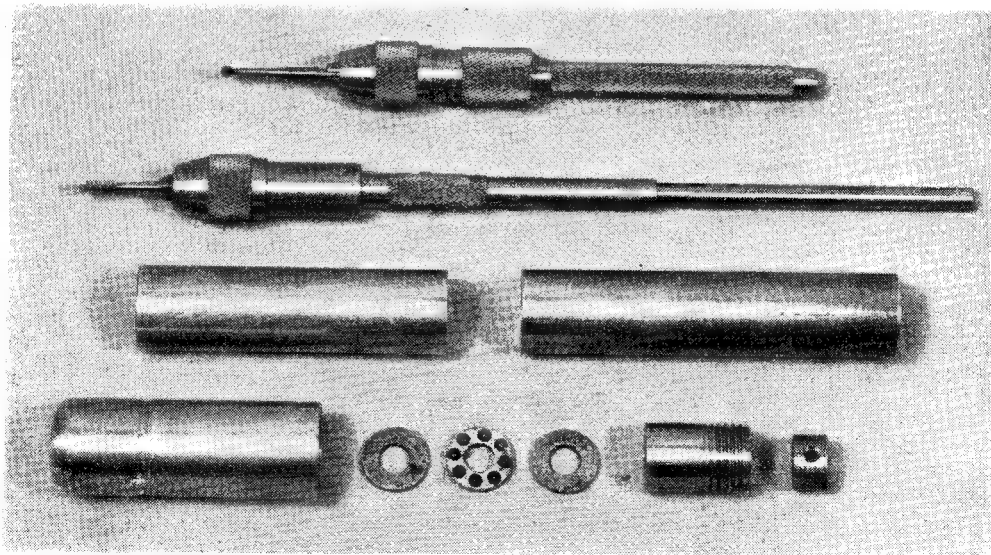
Top—Eclipse No. 3 chuck-type pin vice, gripping rose head-type dental drill. Centre—Spindle fully machined with extension driving spigot pinned in position. Lower centre—Left, nose-piece casing; Right, extension casing. (Main bearing bush pressed in front of nose-piece) Bottom—Left to right. Chuck cover hood, case-hardened washers and brass cage of thrust-race, rear bearing, and terminal securing collar
